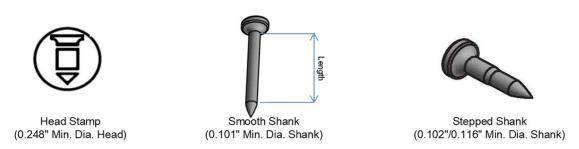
Grabber Track Tool Pin Head Stamp & Dimensions
